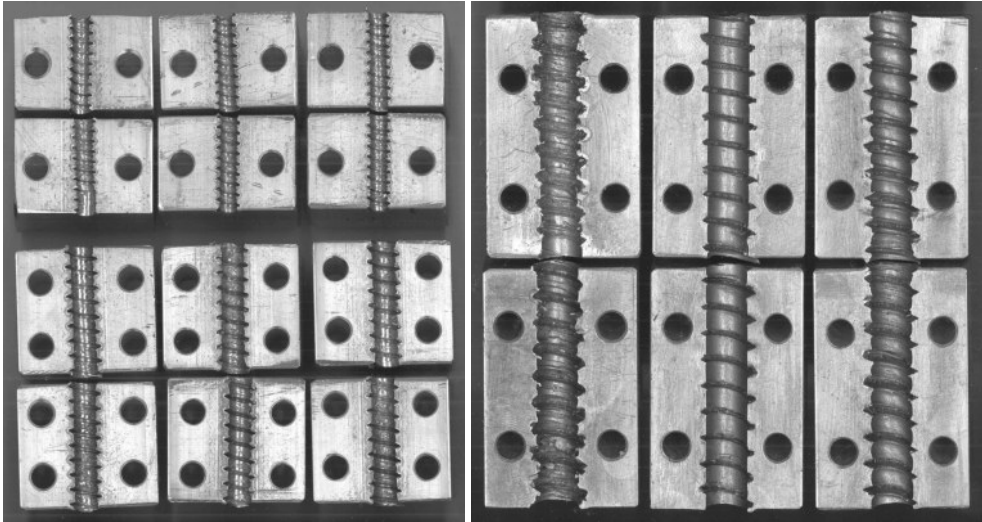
Section views of manufactured aluminium anchoring blocks for screws with $d = 6$ mm (left top), 8 mm (left bottom) and 12 mm (right).
